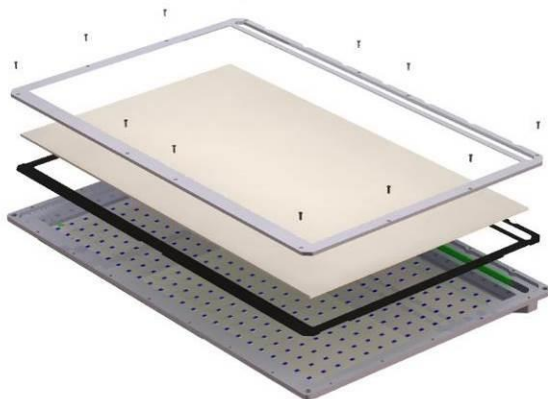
Exploded view of the DL-Backlight Unit
